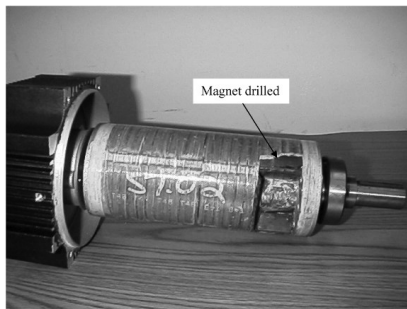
Photo of rotor with a section of the magnet material removed.
